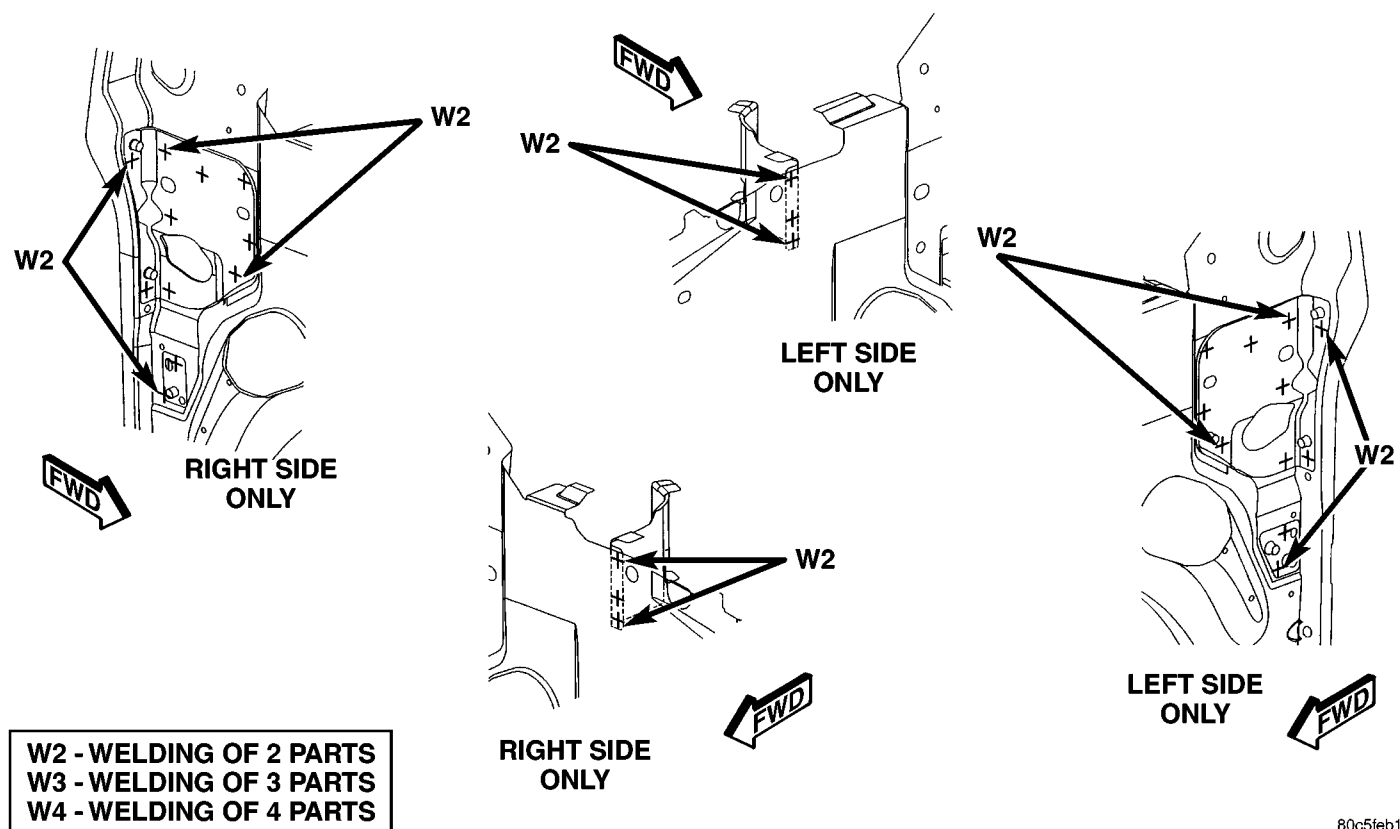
INSTRUMENT PANEL ATTACHMENT TAPPING PLATES
